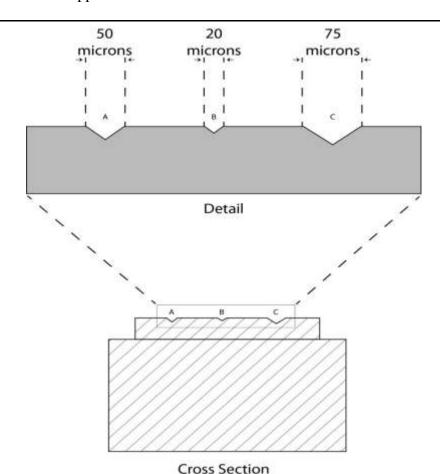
Schematic drawing of the dimensions of the ANSI/ADA Specification No. 18die surface
